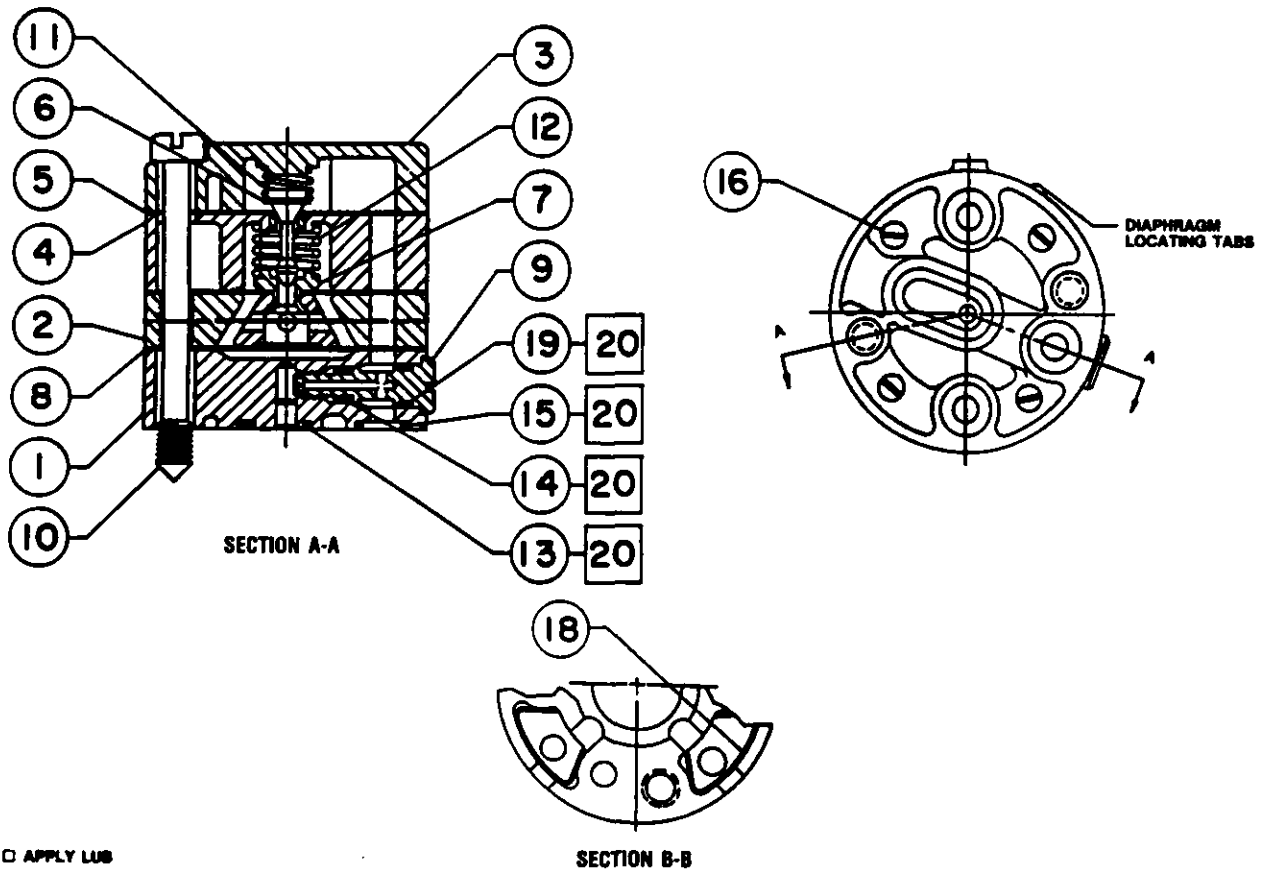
Type 83L Relay Sub-Assembly (Key 32)
